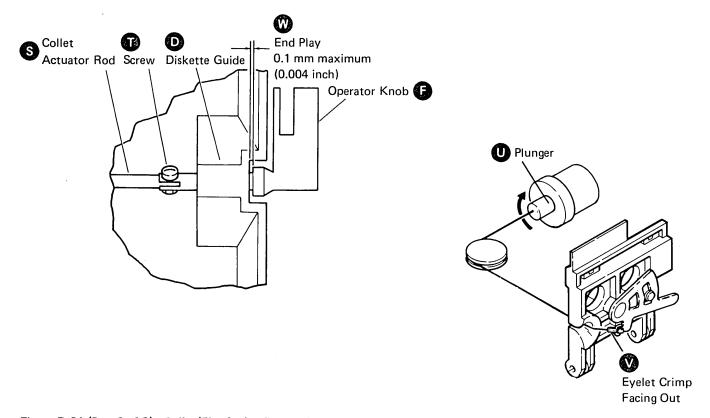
(Part 2 of 2). Collet/Flat Spring Removal
